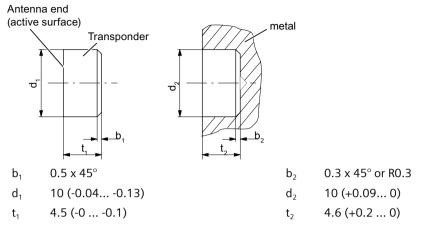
Flush-mounting of MDS D421 / D521 in metal with tools; all dimensions in mm
